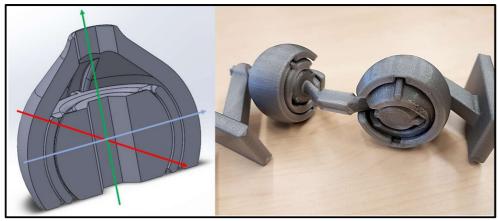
Drive Train with two "Non-Mountable" Universal Joints [10]
